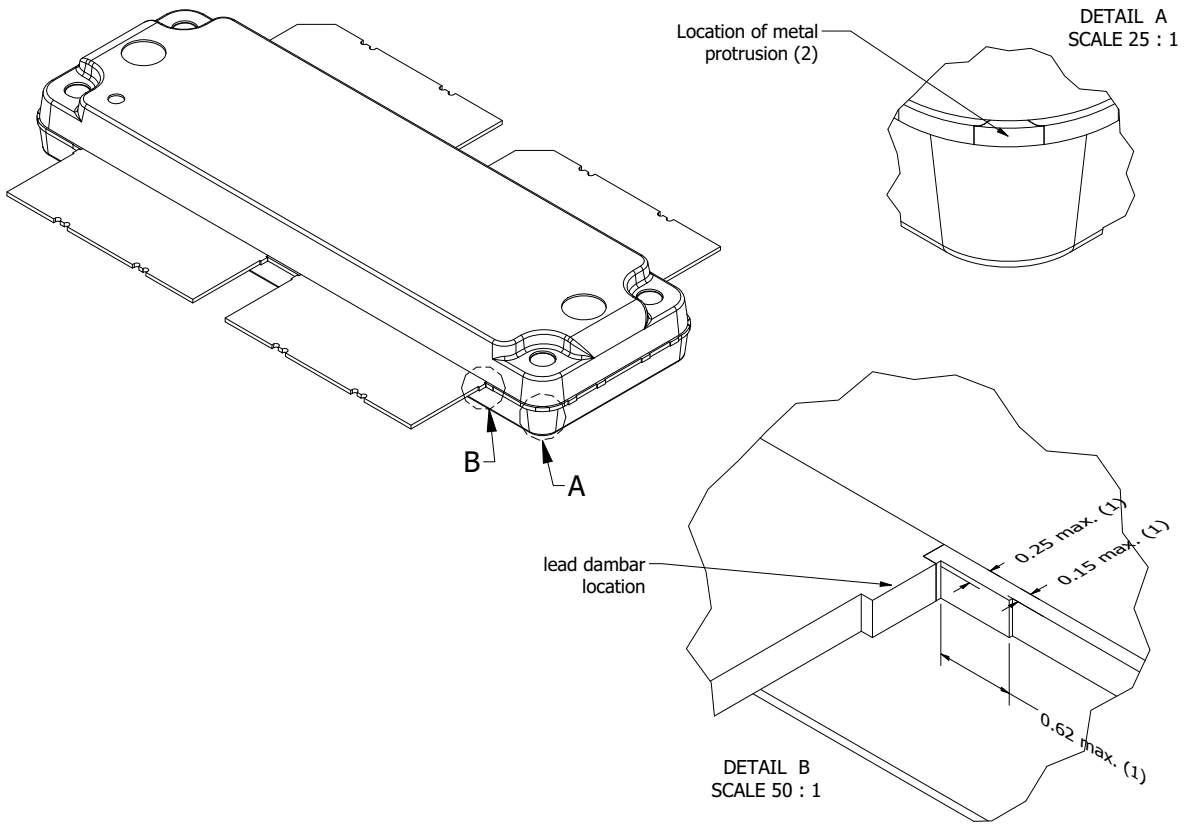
Package outline OMP-1230-4F-1 (sheet 1 of 2)
